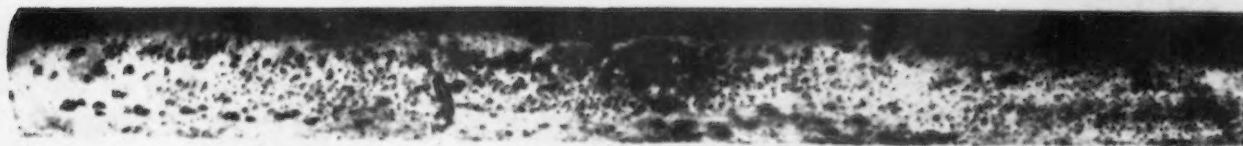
Salt spray test for a sprayed tin coating on 1-in. diameter bar stock. Pin point rust spots appeared after 6 hr.
